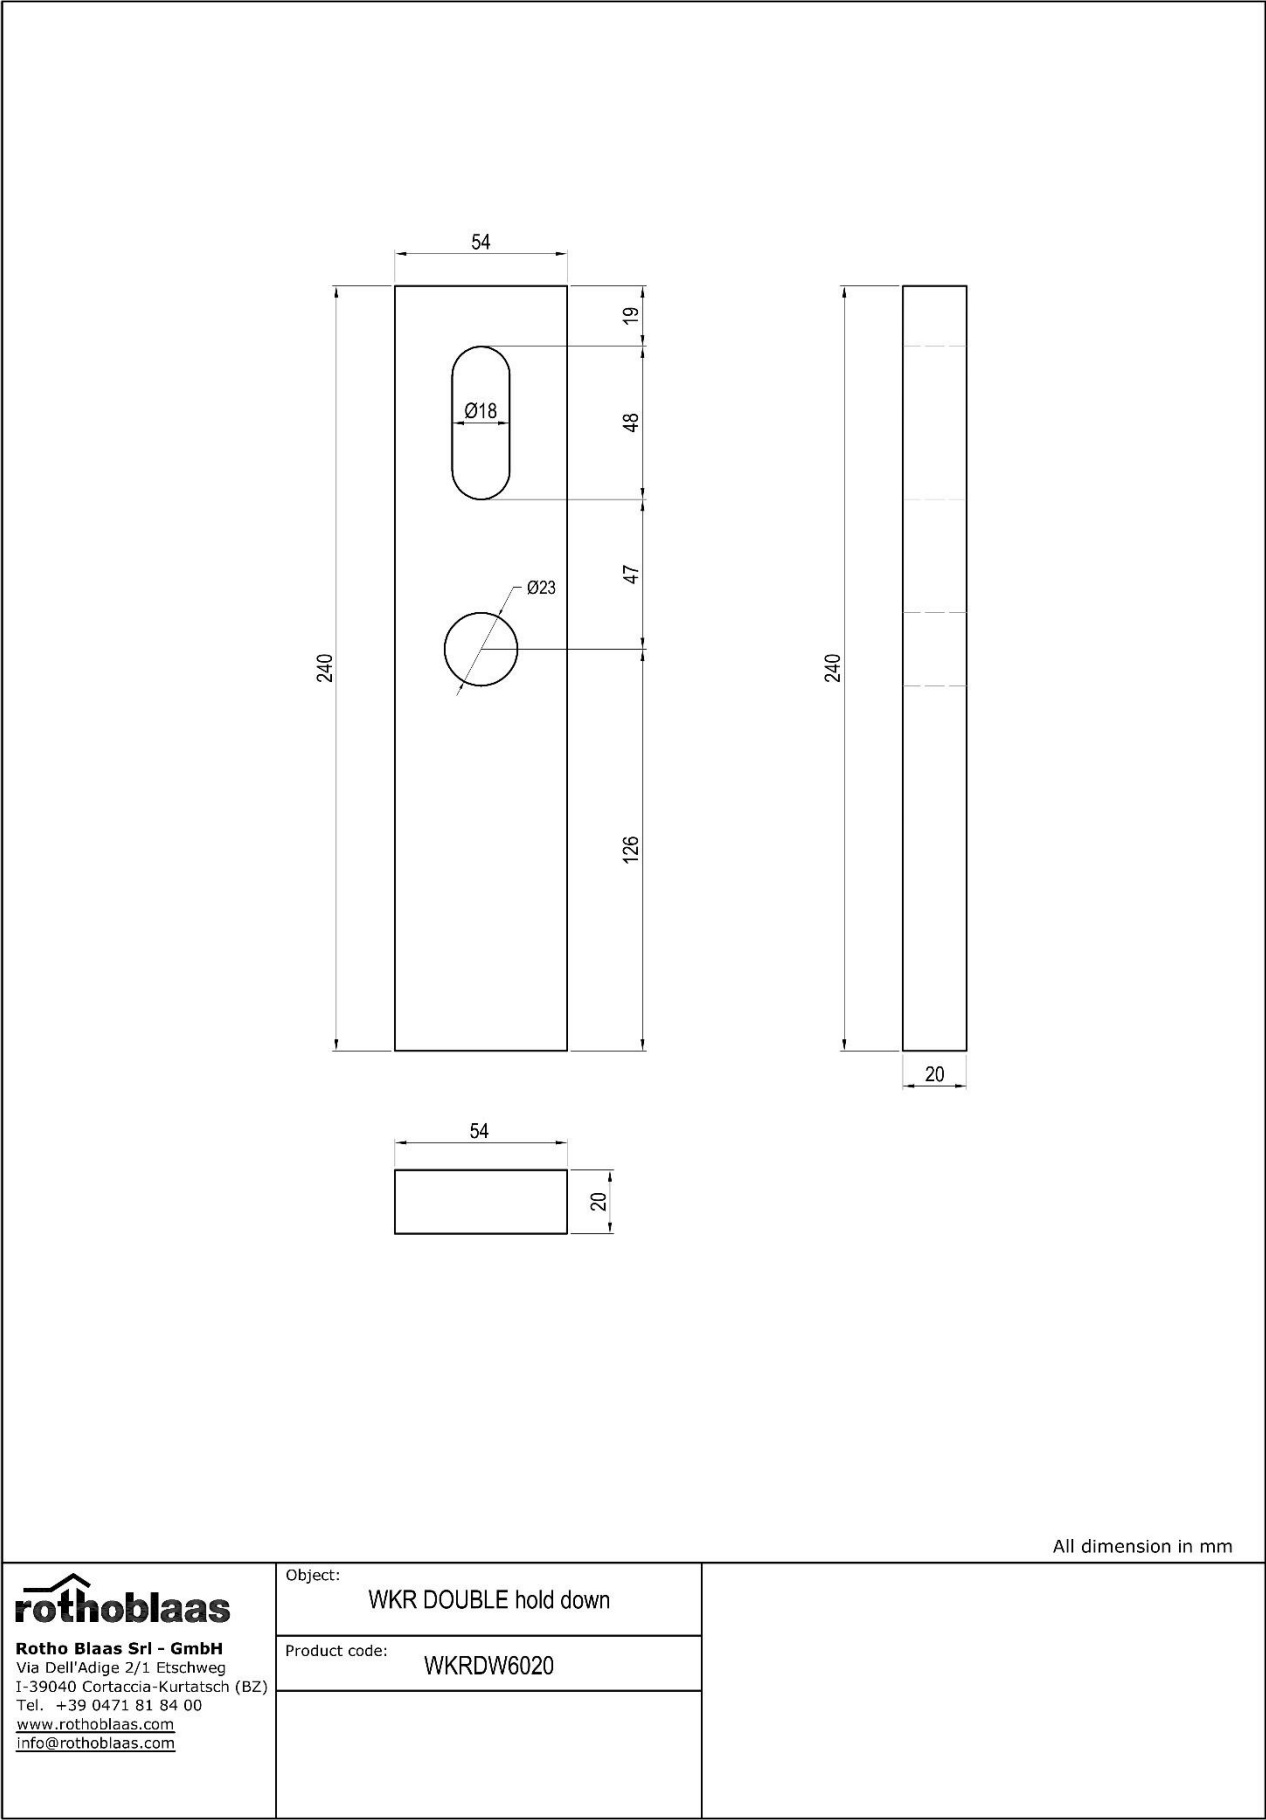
Dimensions of Rotho Blaas WKRDW6020
